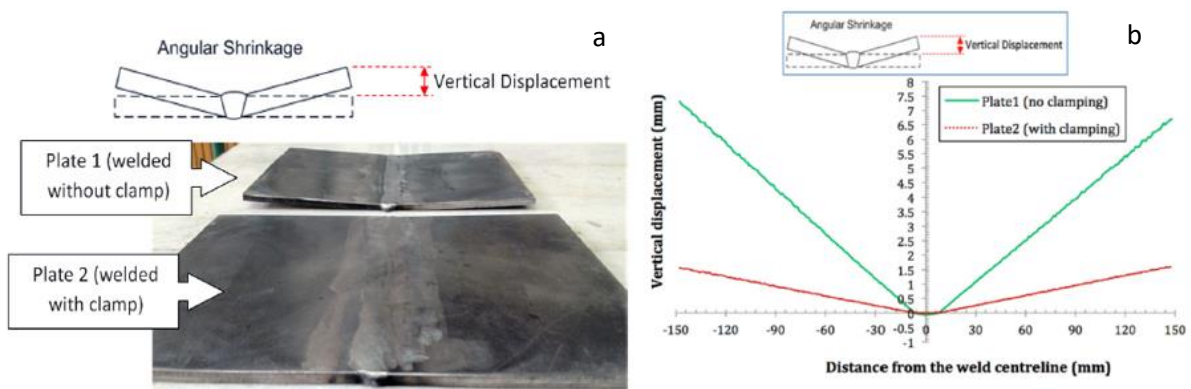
(a) Clamping effect on the welding deformations and (b) Angular shrinkage produced after the welding of Monel plates (Javadi, 2015)
